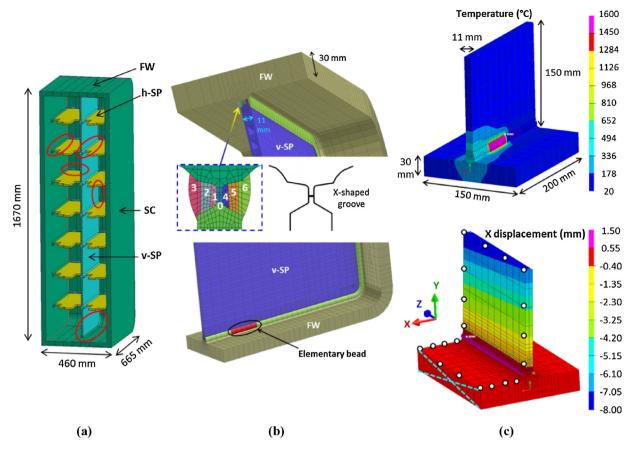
Schematic of the TBM mock-up and welds localization (a); Mesh images for v-SP to Box welding simulation (b); Temperature during welding (up) and X displacements after welding (down) for the T-joint mock-up (c).
